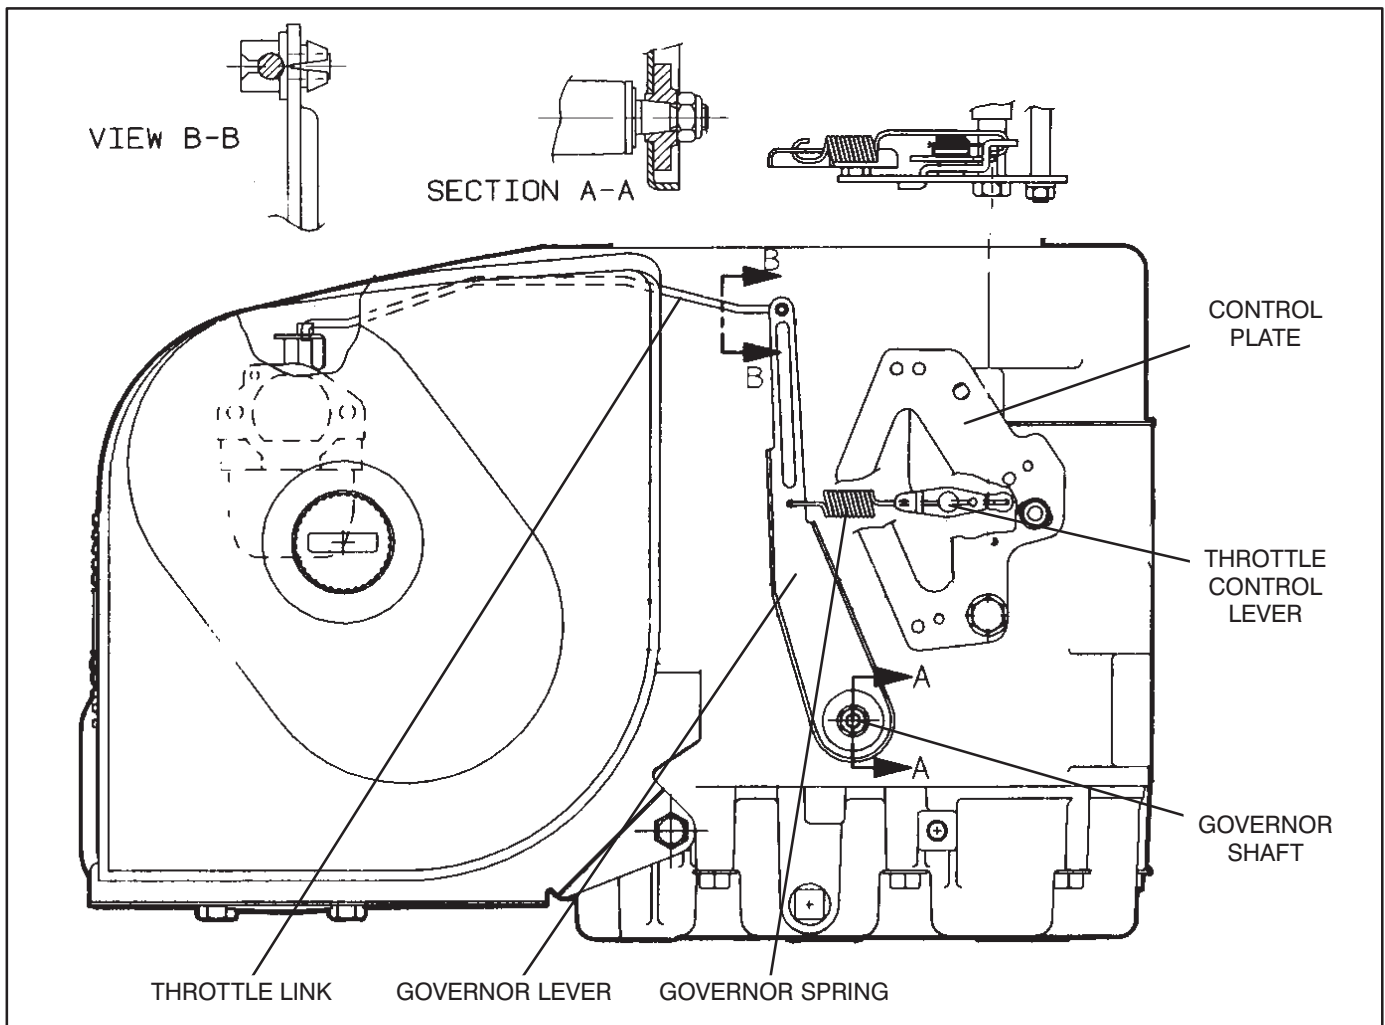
ENGINE GOVERNOR COMPONENTS
